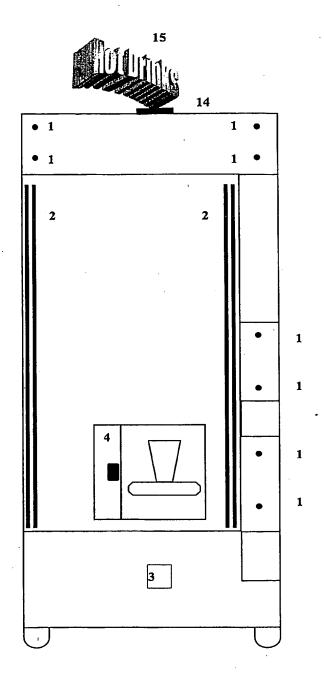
Reverse of Panel 8 and Vending Machine Chassis that has not been Customized (Front View)
